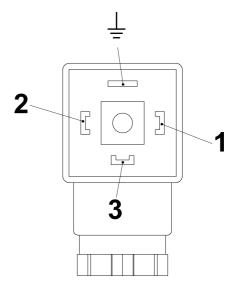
Pin assignment, plug socket, Change-over contact (Form 30x70)
